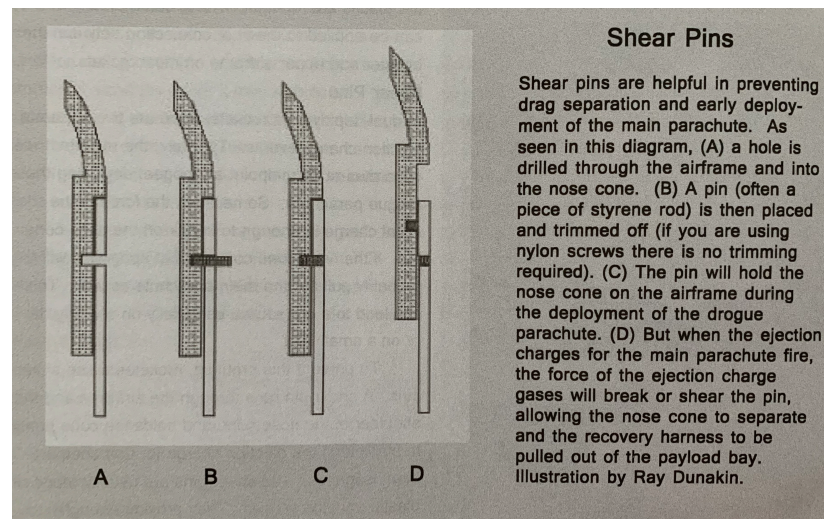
Piston ejection system utilizing shear pins [12]
